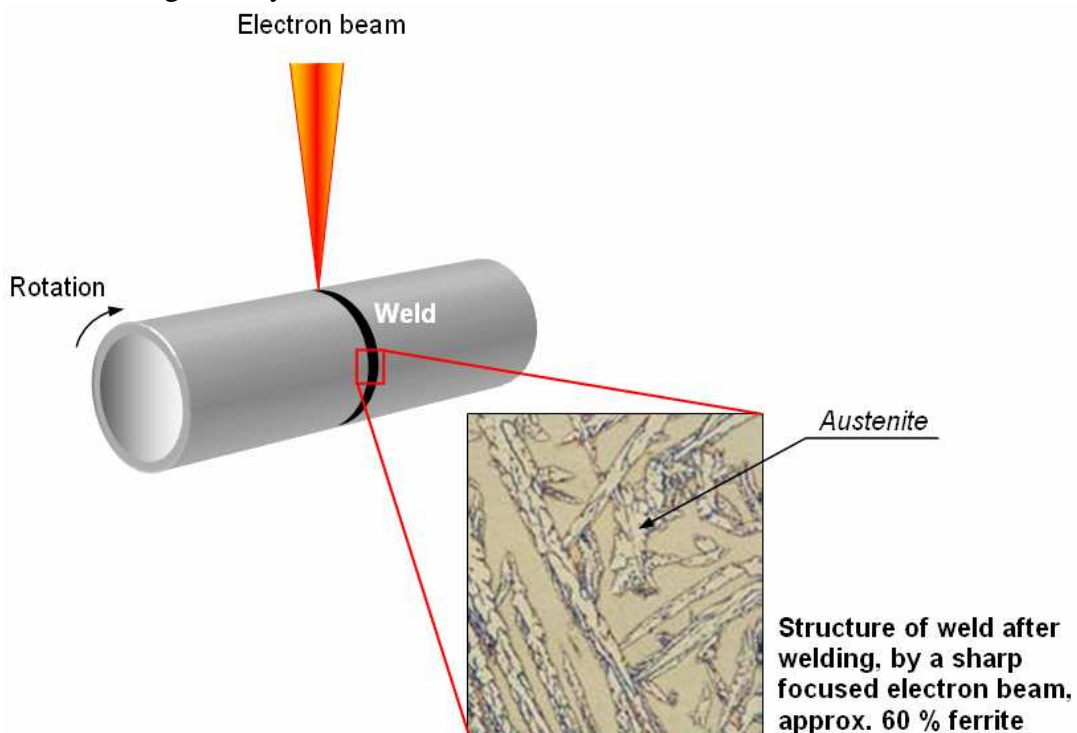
Welding of duplex steel by a sharp focussed electron beam
